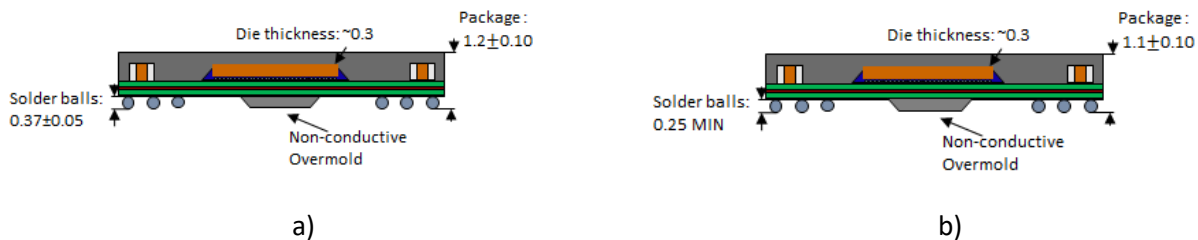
DDR package dimensions in millimeters. a) DDR3 Samsung package dimensions b) DDR4 Micron package dimensions
